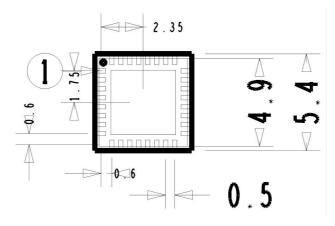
Suggested PCB layout for the integration of the bPOL12V_V6 QFN32 package.
